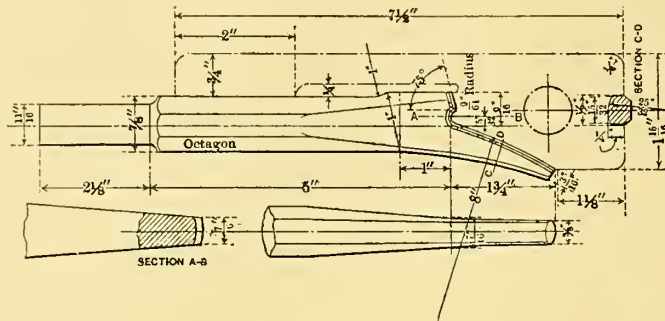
DETAILS OF A STANDARD BEADING TOOL.
